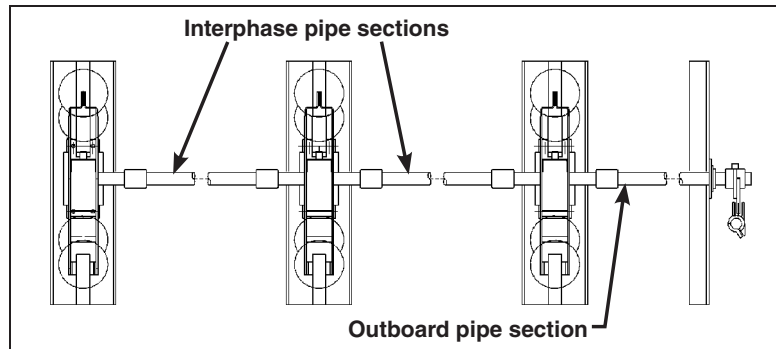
Pipe connecting the switch poles and the outboard bearing.
